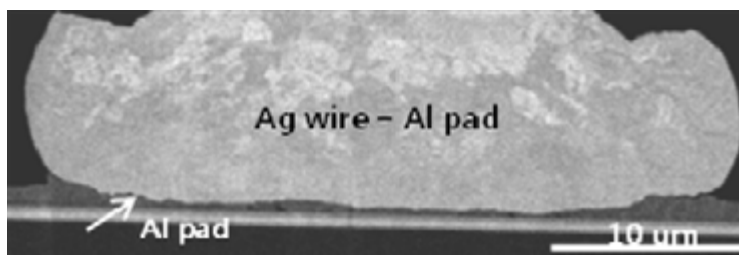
Example of a cross-section of a ball bond joined to a bonding pad [4].
